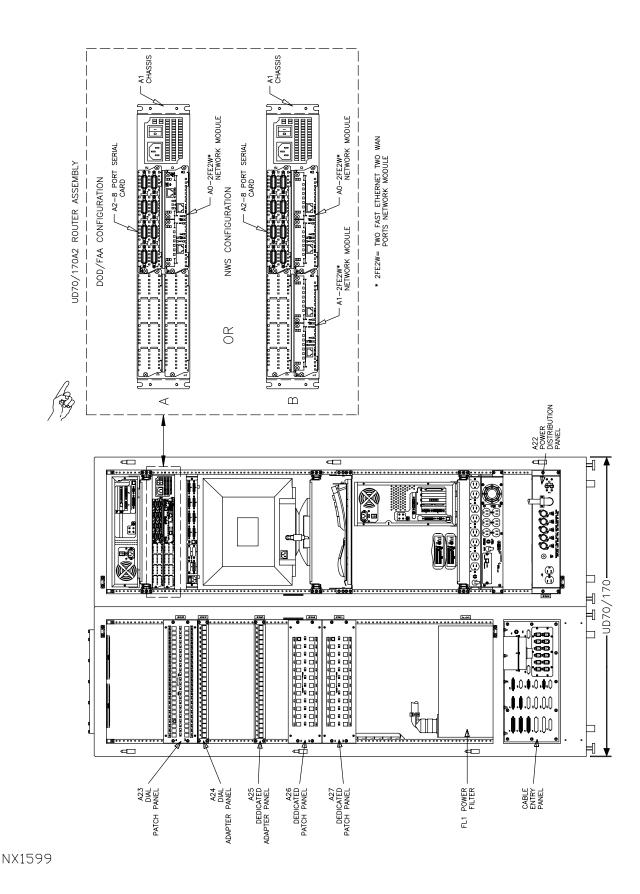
RPG Processor/Communications Assembly Cabinet UD70 (Rear View) (Sheet 2 of 2)
